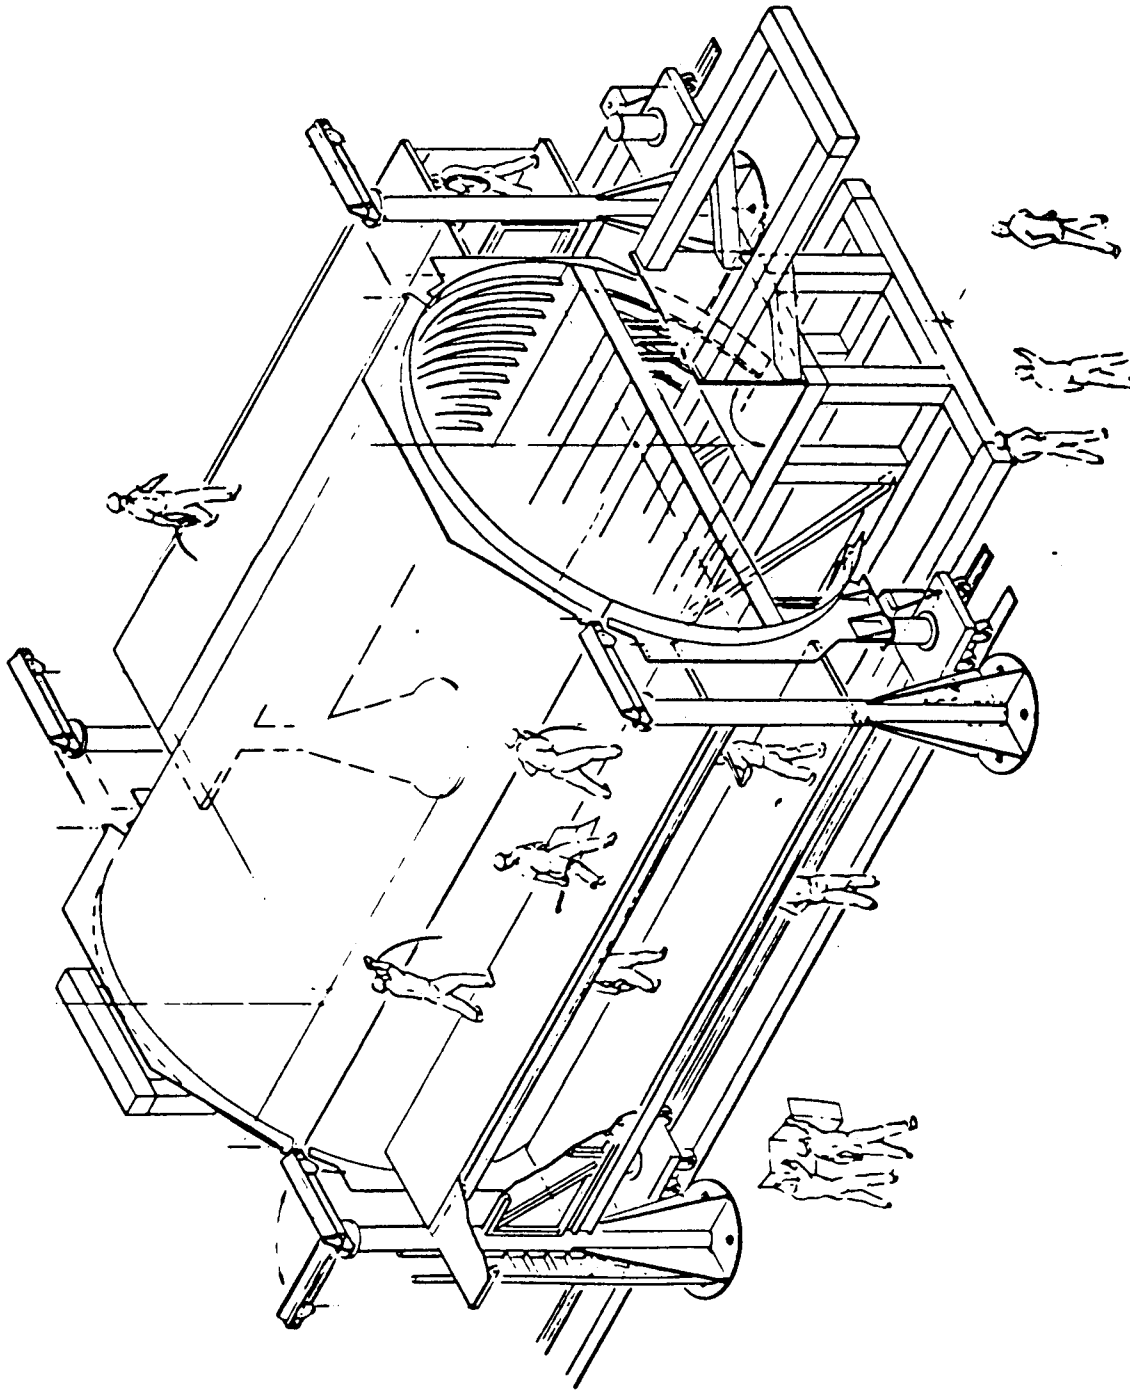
| MANUFACTURING DEVELOPMENT CENTER-BARREL ASSEMBLY JIG
